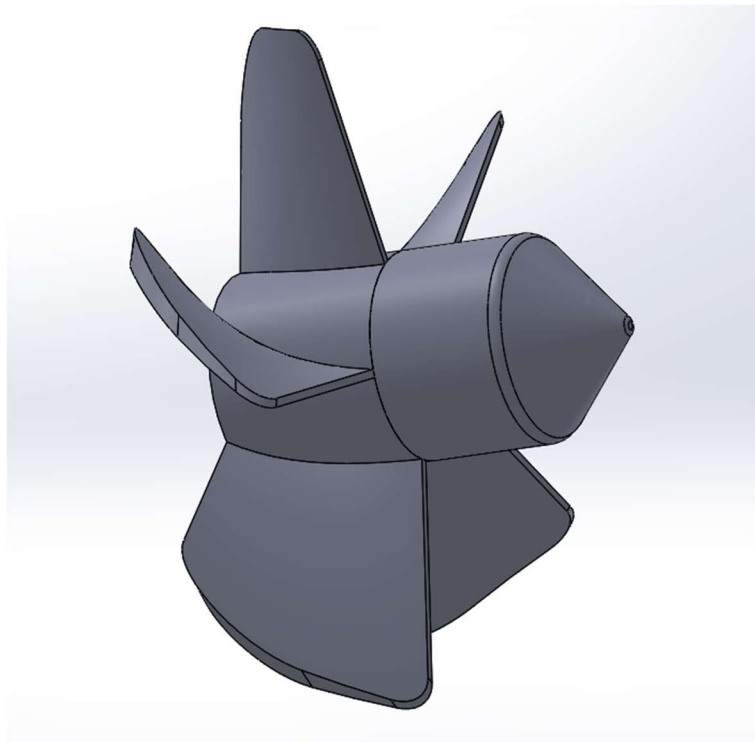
SolidWorks model of rotating magnet flow meter propeller assembly
